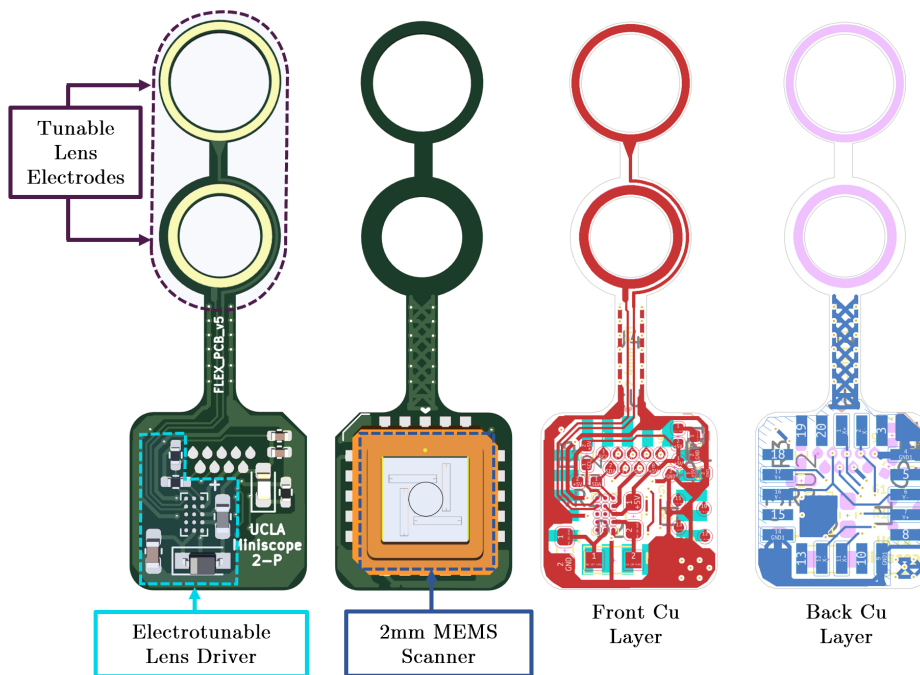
UCLA 2P Miniscope Flex PCB design
